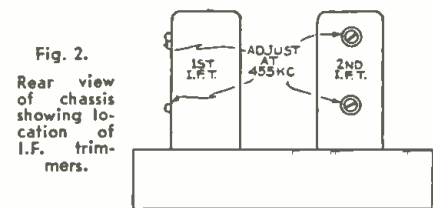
Rear view of chassis showing location of I.F. trimmers.
